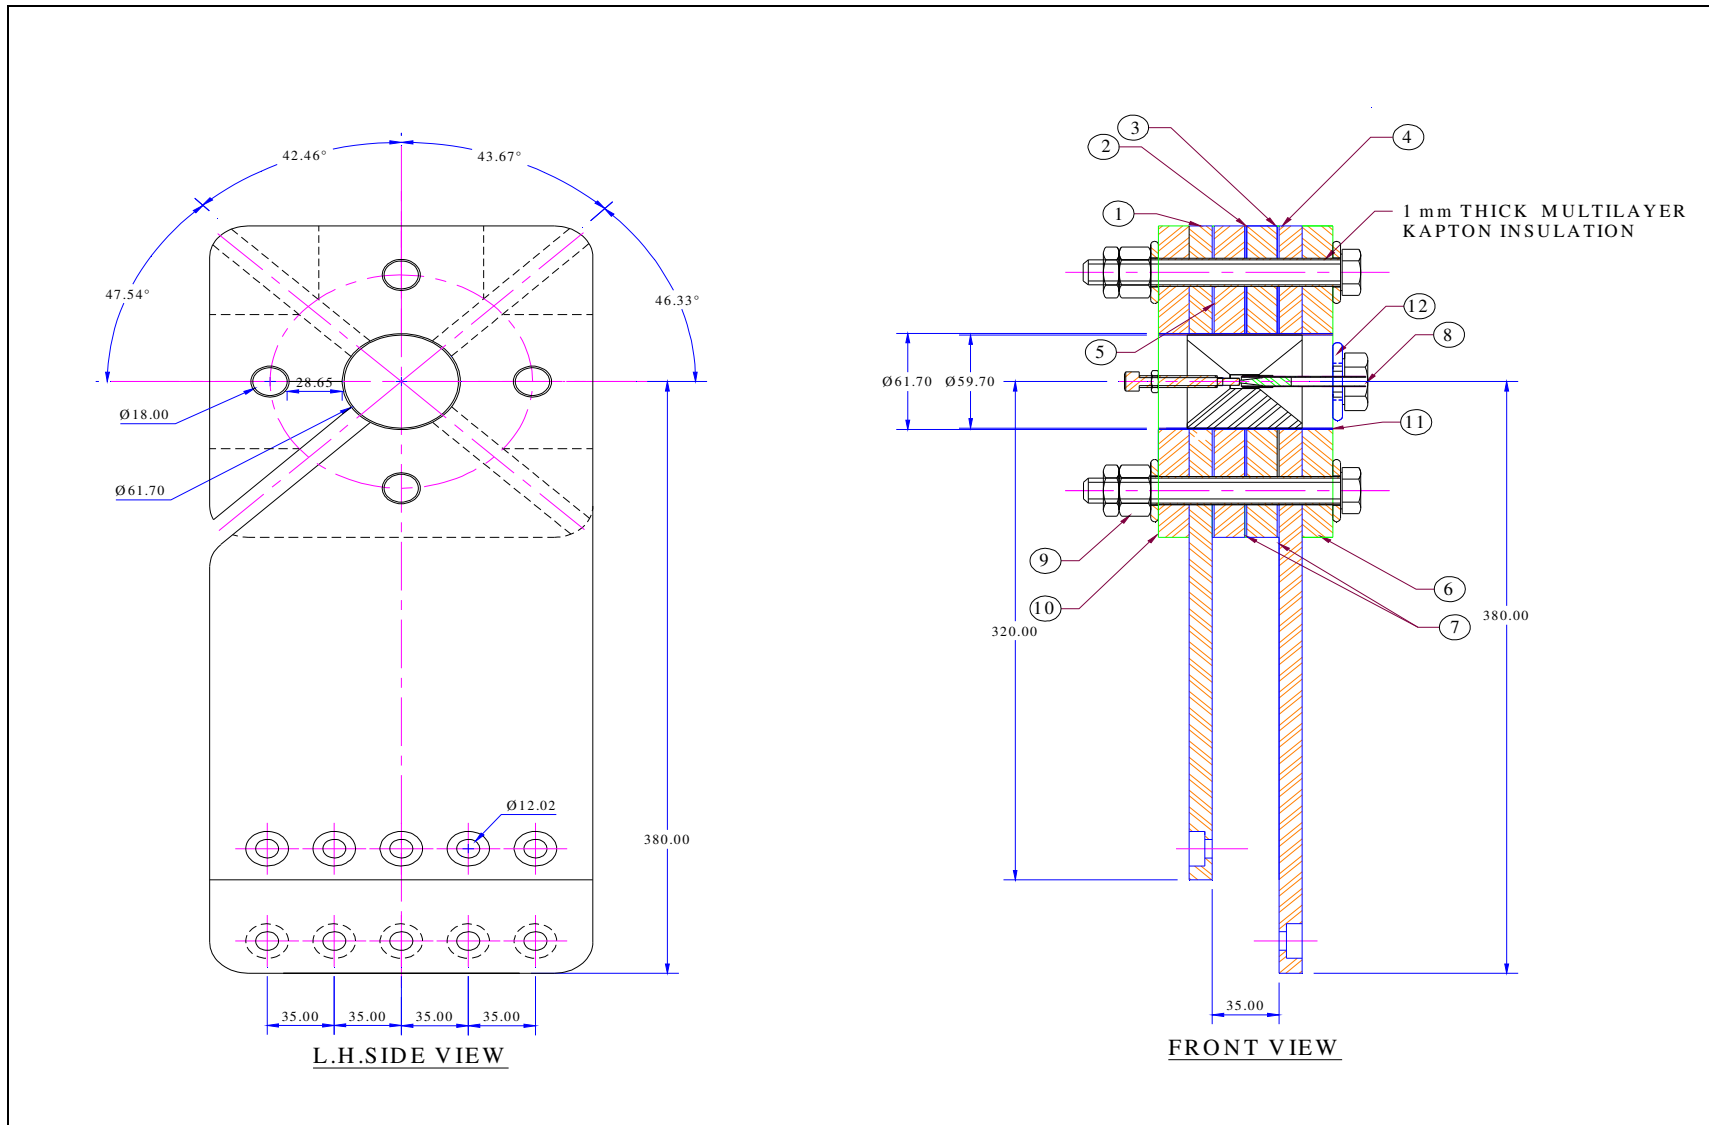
Assembly of Coil. QTY: 2 Sets (MRK/HELIX-1/ASS)
